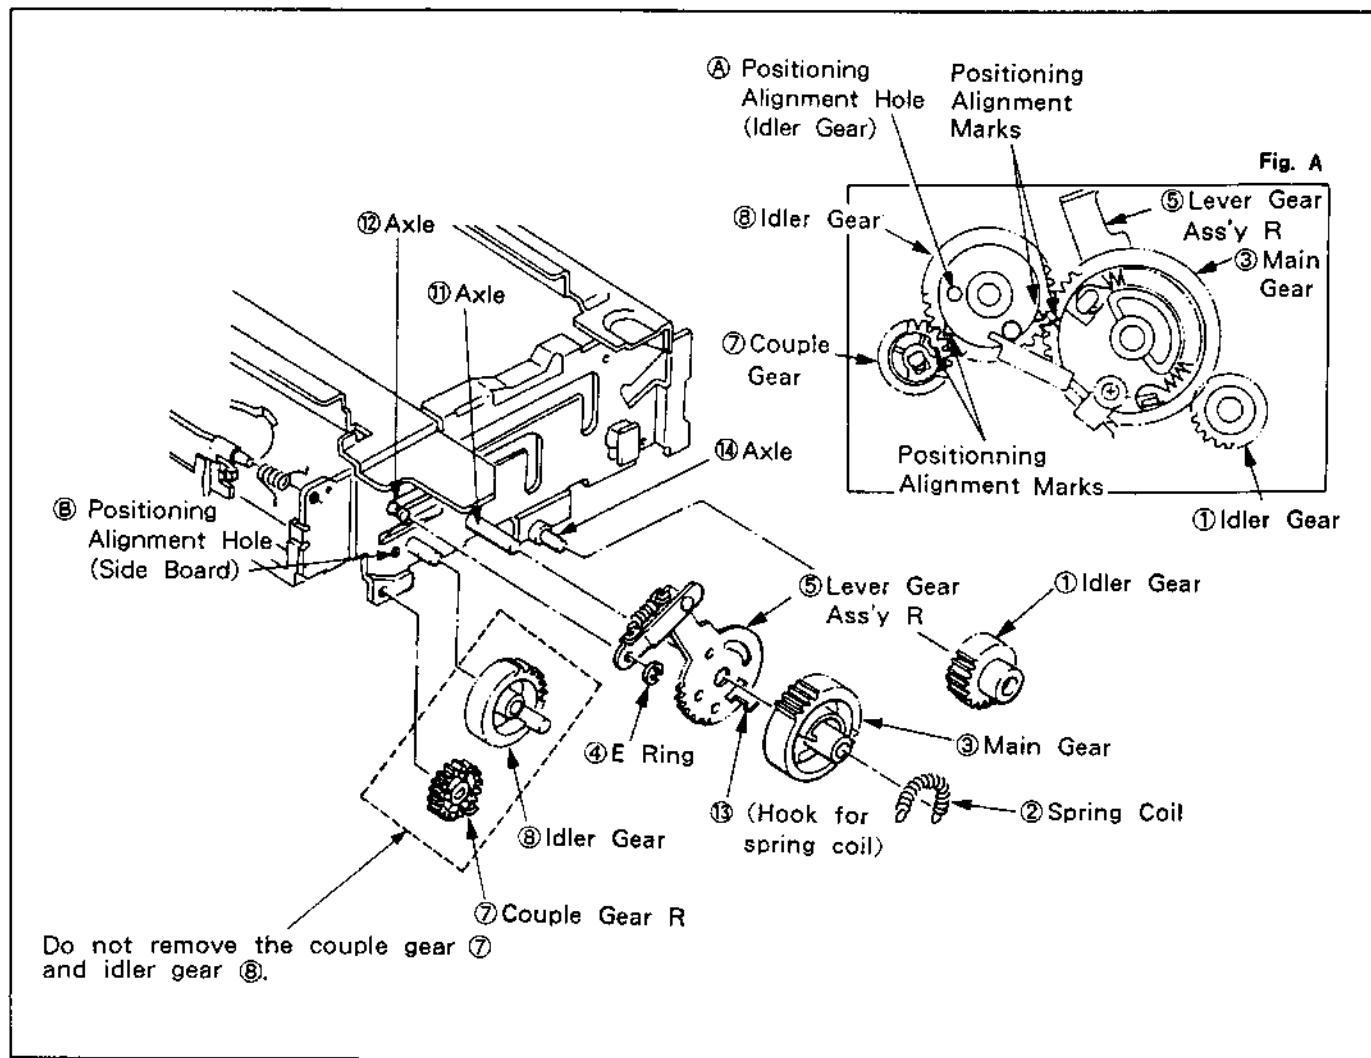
Cassette Drive Gears (Right Side)
